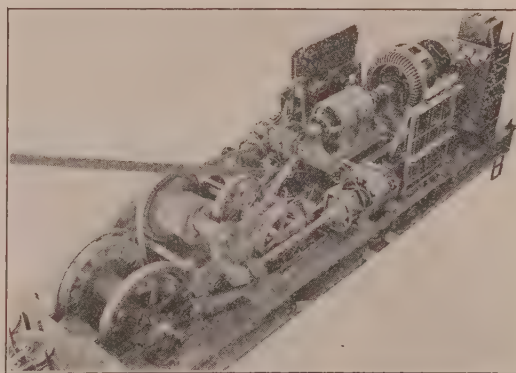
RAILROAD TYPE SHOVEL WITH HOUSING REMOVED TO SHOW ARRANGEMENT OF MECHANICAL PARTS AND ELECTRICAL EQUIPMENT
